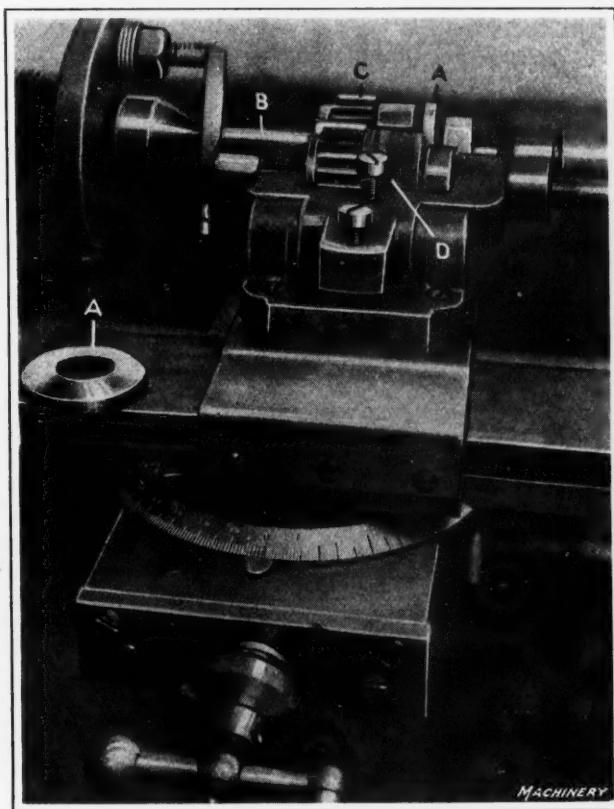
Bench Lathe equipped with Gear-driven Device for rolling the Graduations into Feed-screw Index-collars
